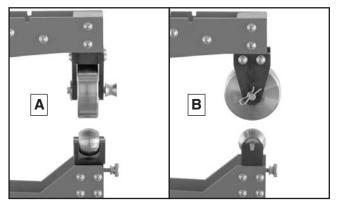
Wheels positioned to accommodate different workpiece sizes.
